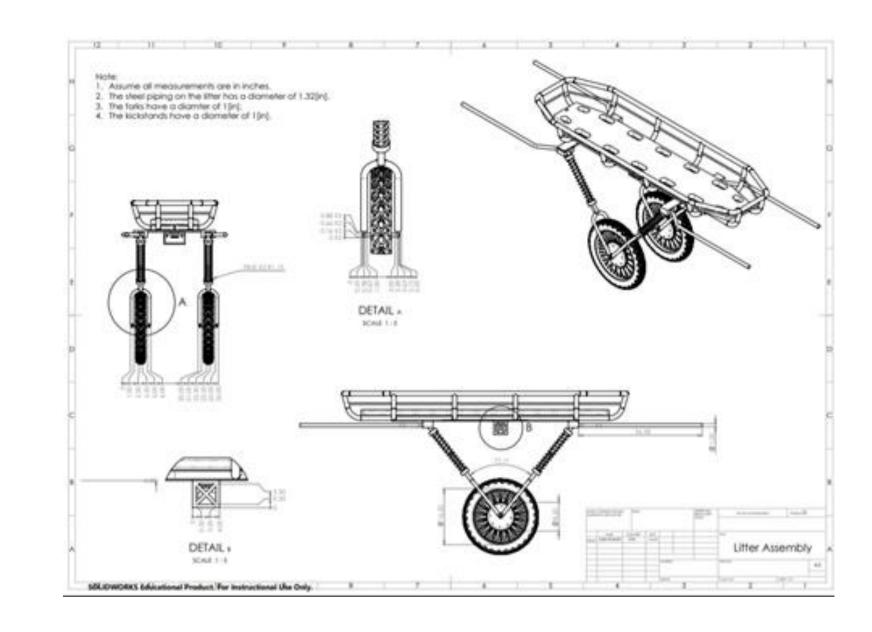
Pre-Fabricated litter mechanical drawing.
